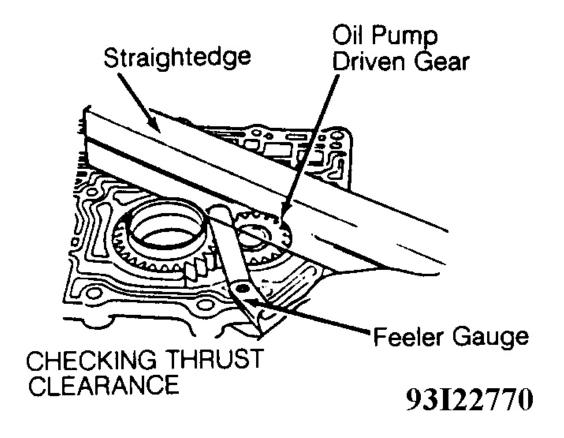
Checking Thrust Clearance Courtesy of AMERICAN HONDA MOTOR CO., INC.
